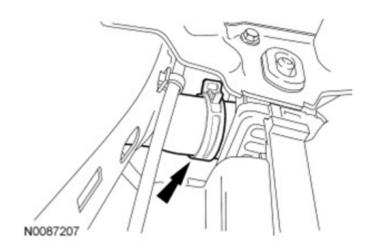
Locating Heater Hose Clamps Courtesy of FORD MOTOR CO.
